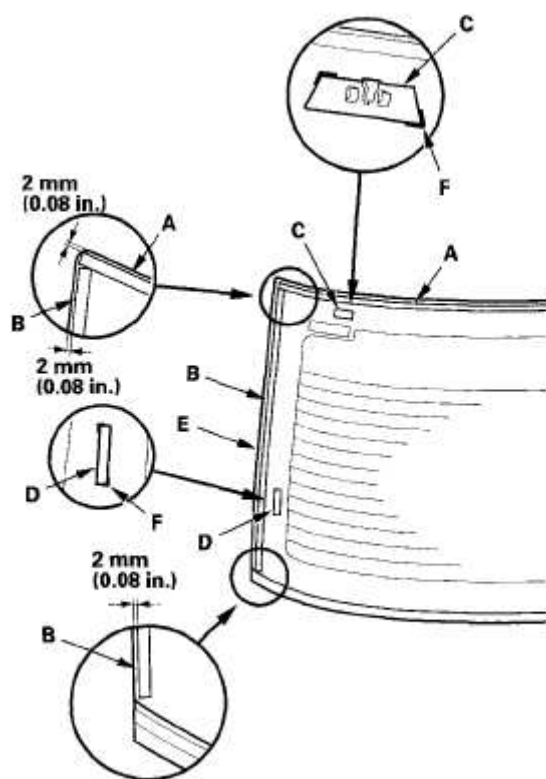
Attaching Upper Rubber Dams, Side Rubber Dam, Clips And Fasteners With Adhesive Tape To Inside Face Of Rear Window (With Specifications)
